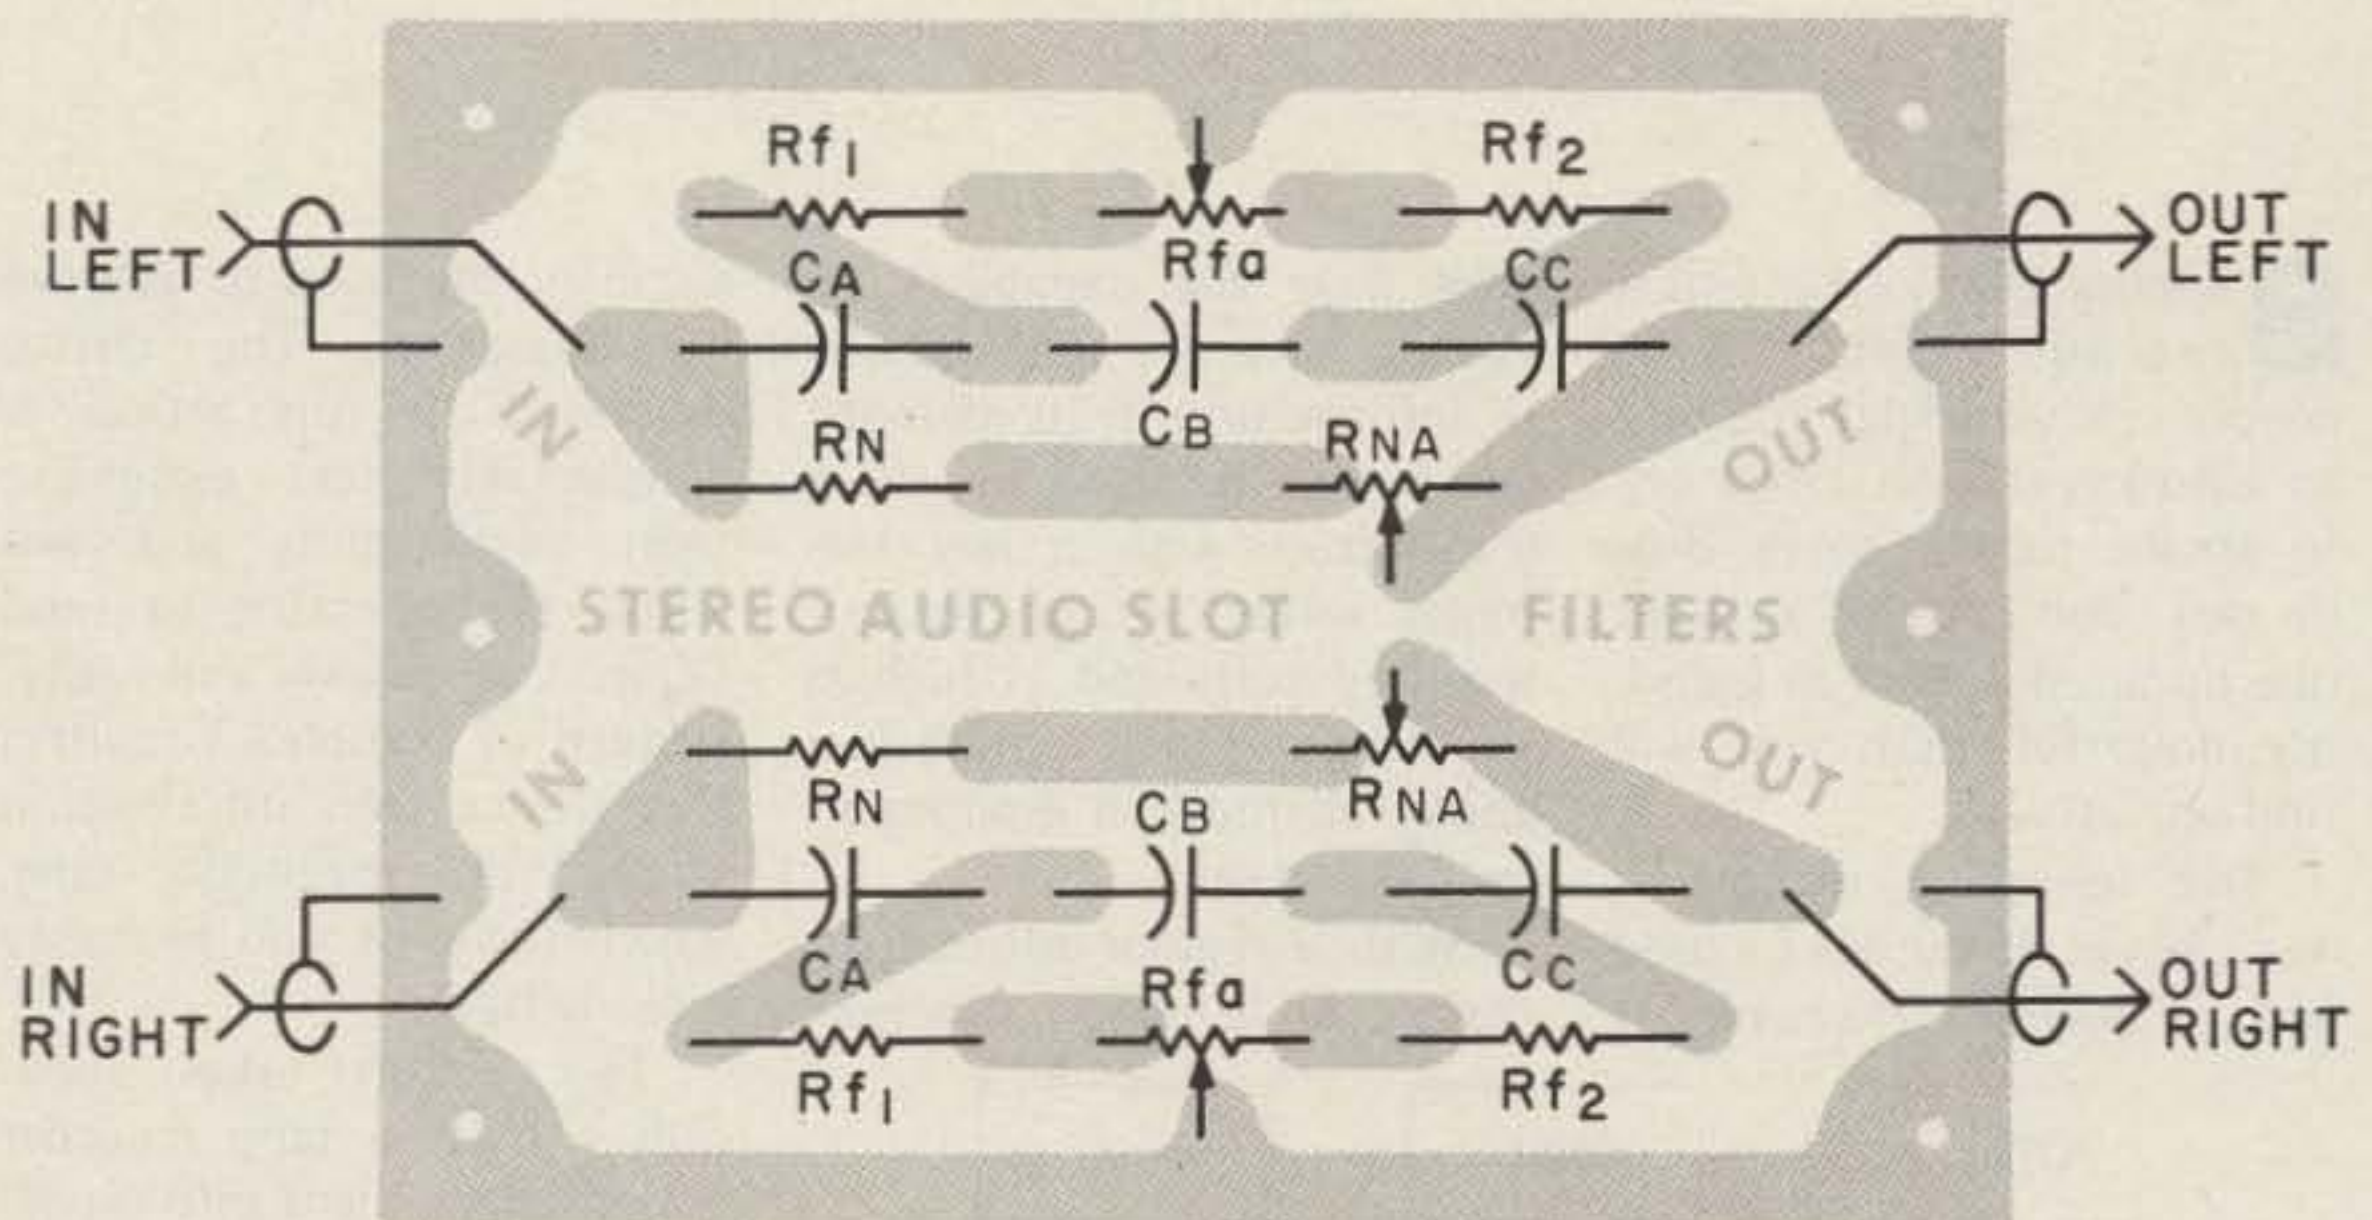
Bottom view, copper side. Board may be split along lettering for two separate filter boards.
